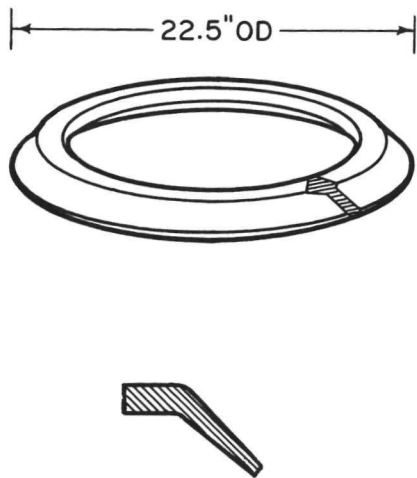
A flash-welded L-605 jet-engine ring.
